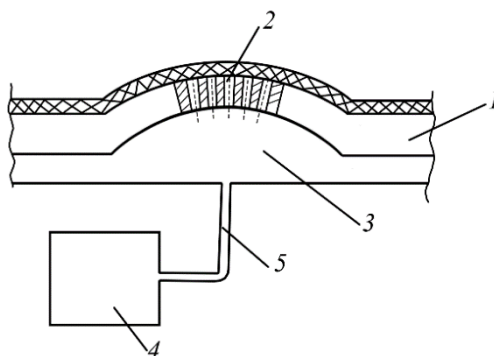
The lower cushion of the vacuum forming device for clothing parts:
